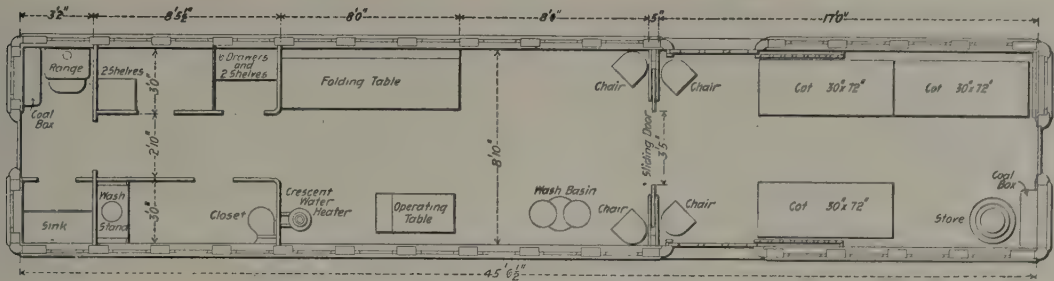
Floor Plan of Lehigh Valley Hospital Car.
